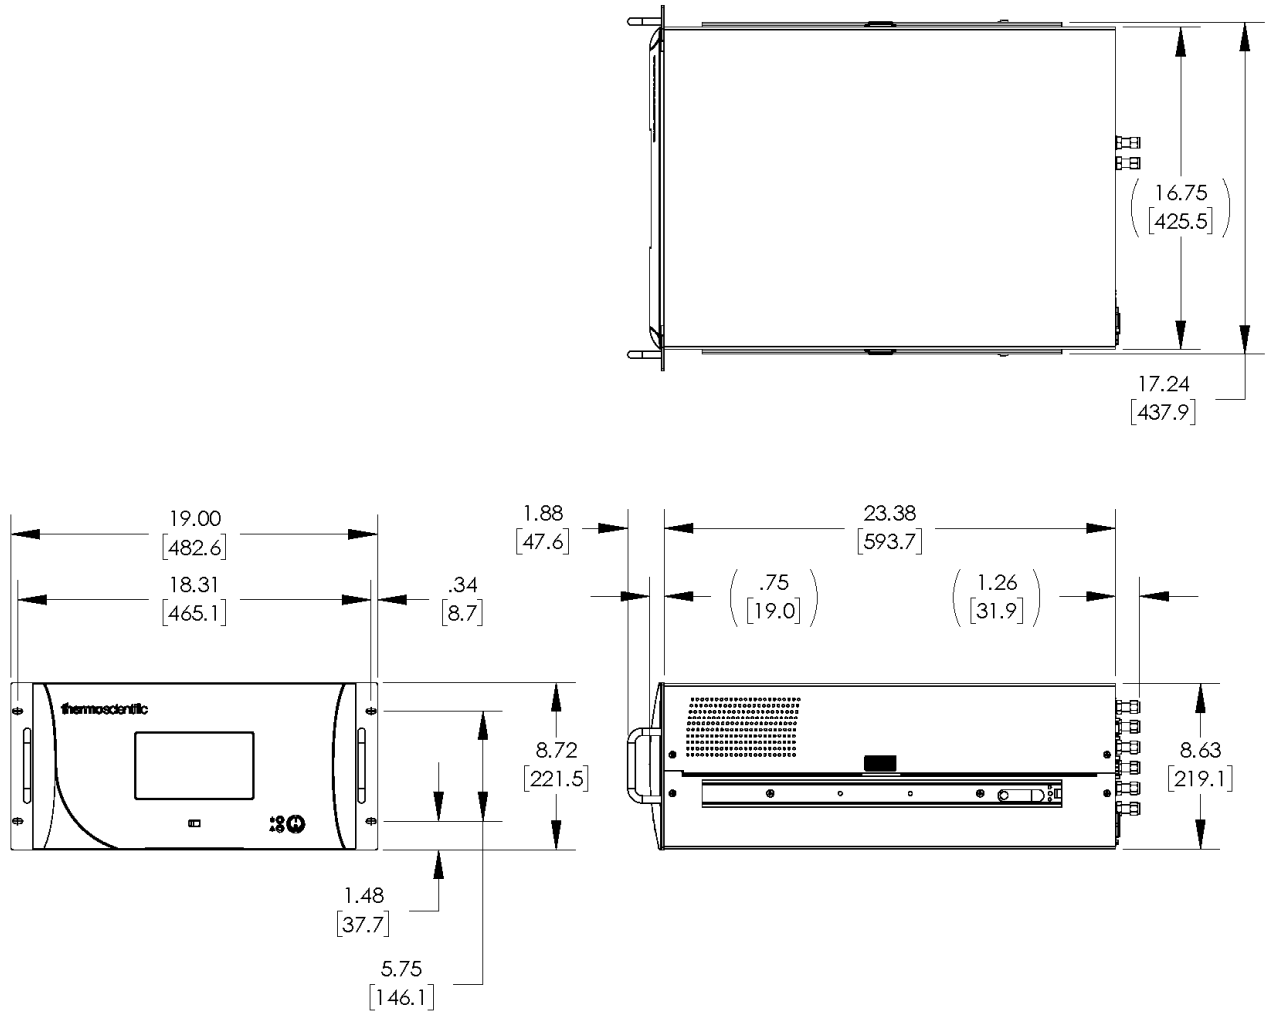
Rack Mount Assembly (dimensions in inches [mm])
